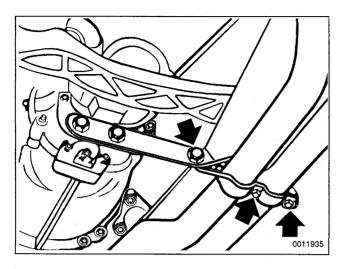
Exhaust system support bracket on 6-cylinder engine. Remove bolts (arrows) to separate from exhaust pipe.
